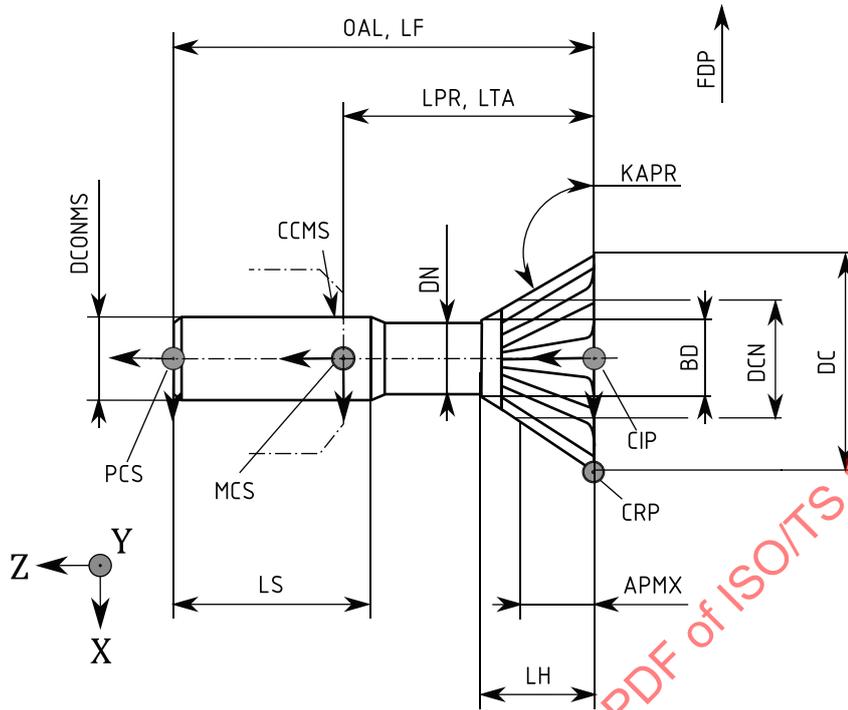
ISYC 303-04 - Dovetail end mill, solid
